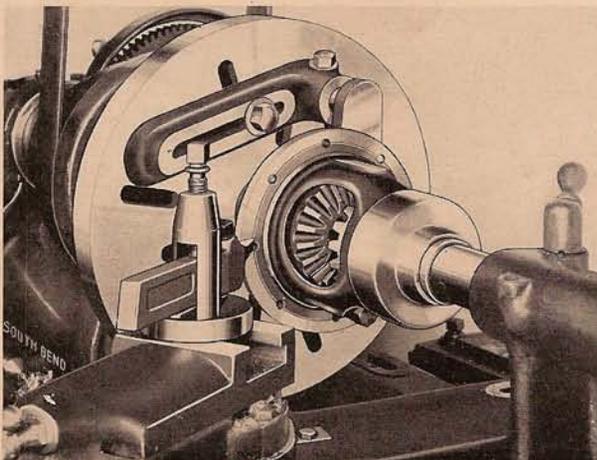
Truing Drive Gear Flange of a Differential Mounted in the Lathe using South Bend Differential Centering Supports.
